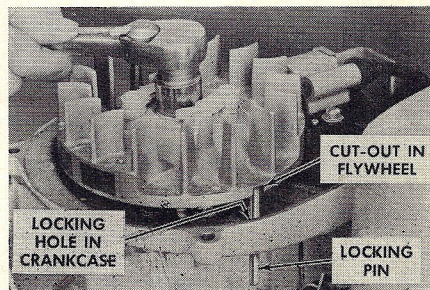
View showing method of locking engine flywheel to remove flywheel retaining nut.
